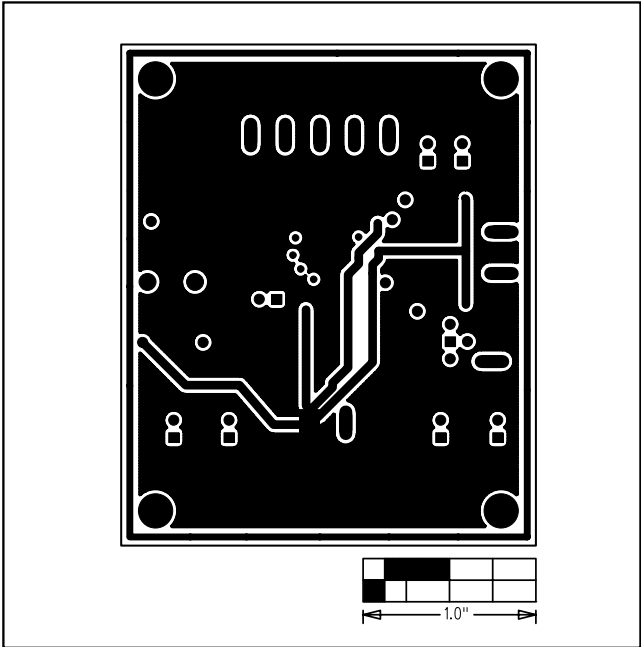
MAX9770 EV Kit PC Board Layout—Layer 2 (GND)
